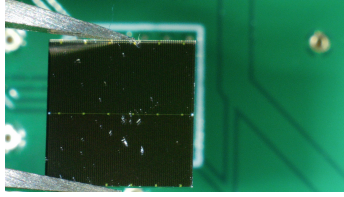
The SiPM sensor when placed on the receiver PCB
